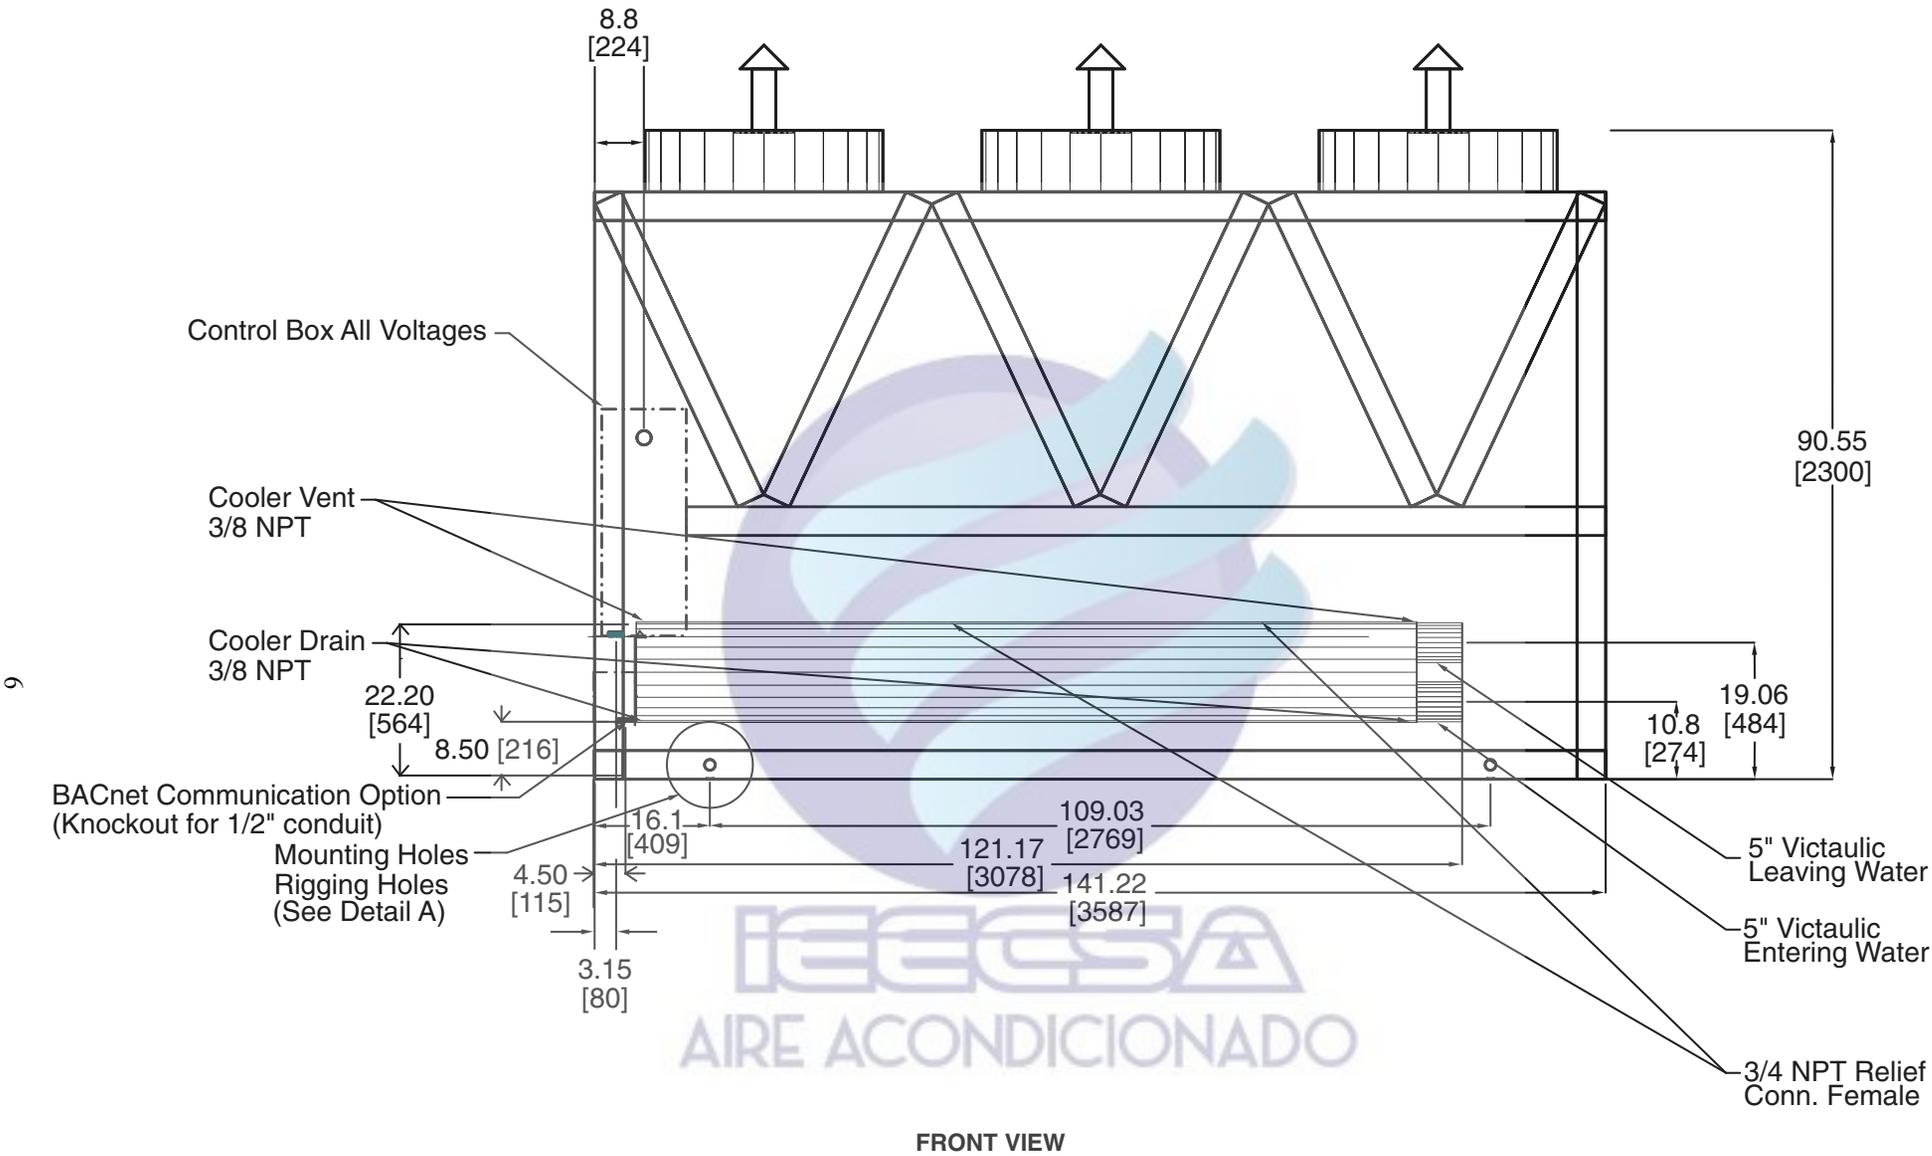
30XA080 Air-Cooled Liquid Chiller Dimensions (cont)
